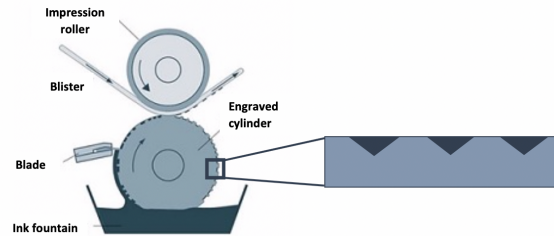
The printing process using rotogravure. Cylinder cells illustrated correspond to a electro-mechanical engraving.
